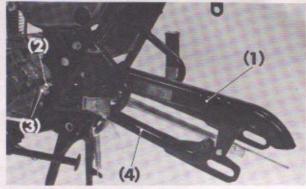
(1) Drive chain case (3) Pivot bolt (2) Self-locking nut (4) Rear fork
